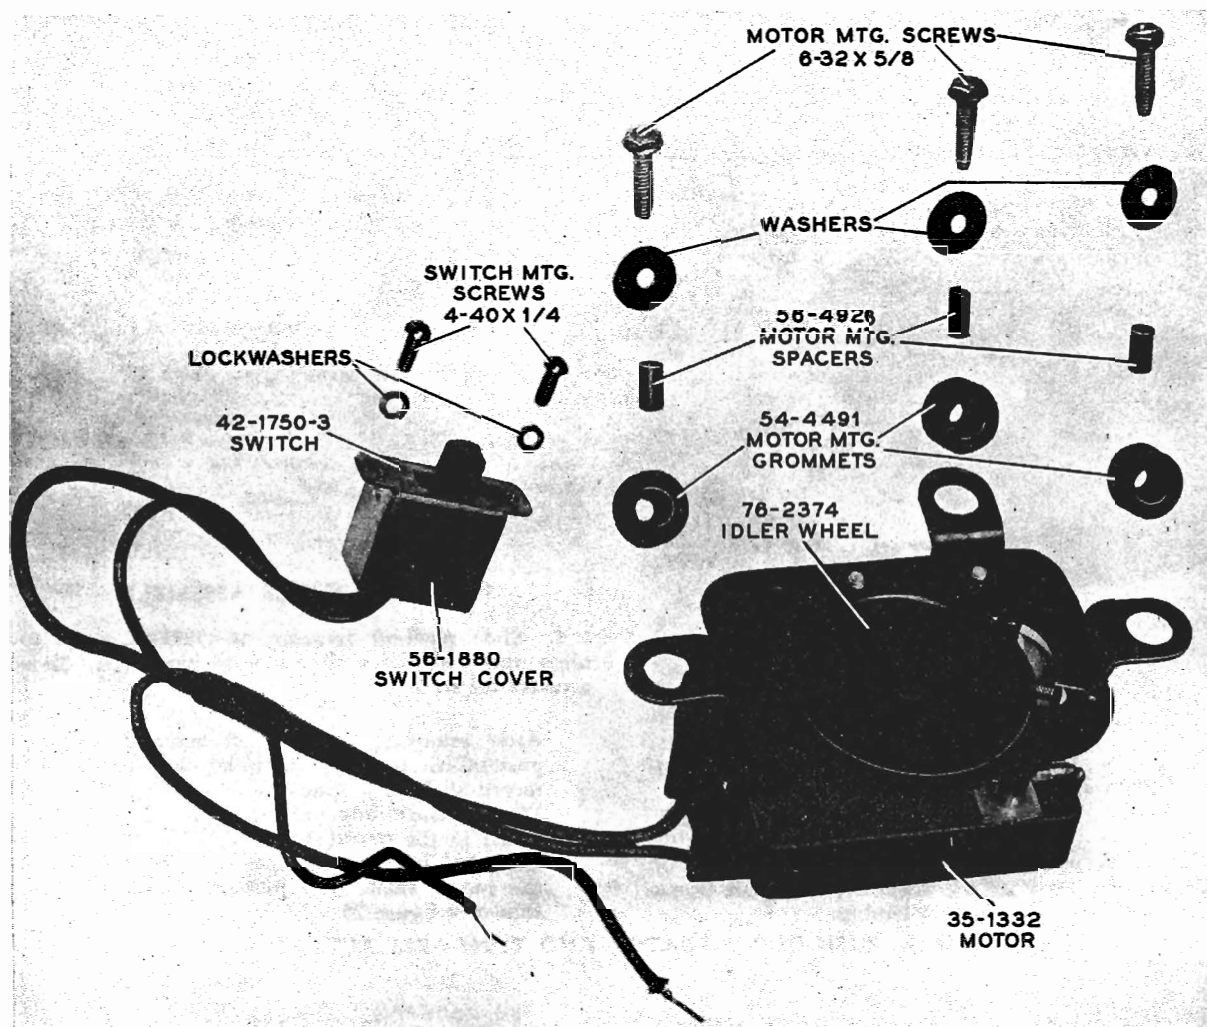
MOTOR, SWITCH, AND MOUNTING HARDWARE
